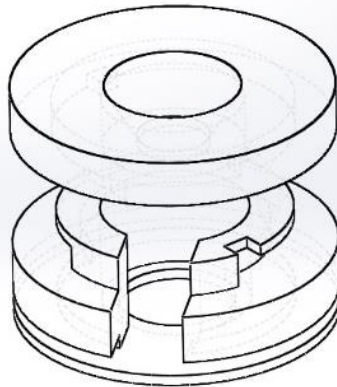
Solidworks drawing of the designed electrode adapter.
